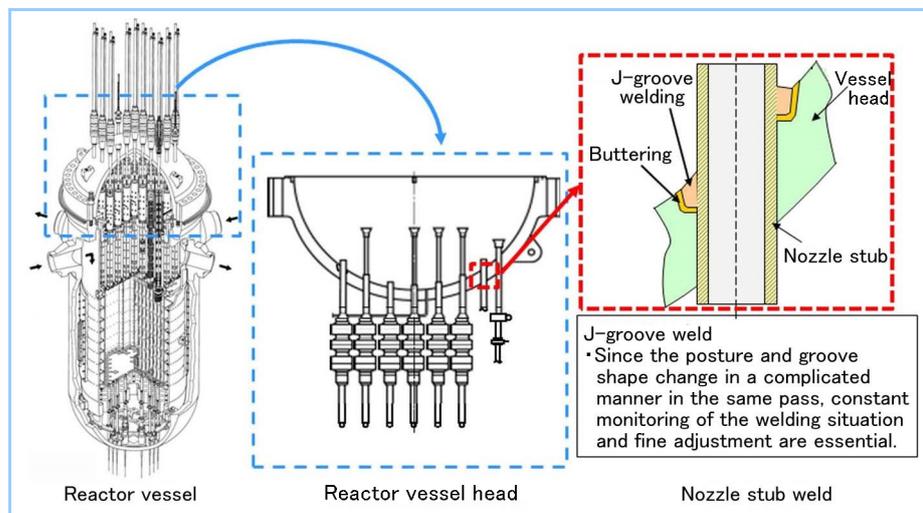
Schematic view of reactor vessel upper lid nozzle weld
